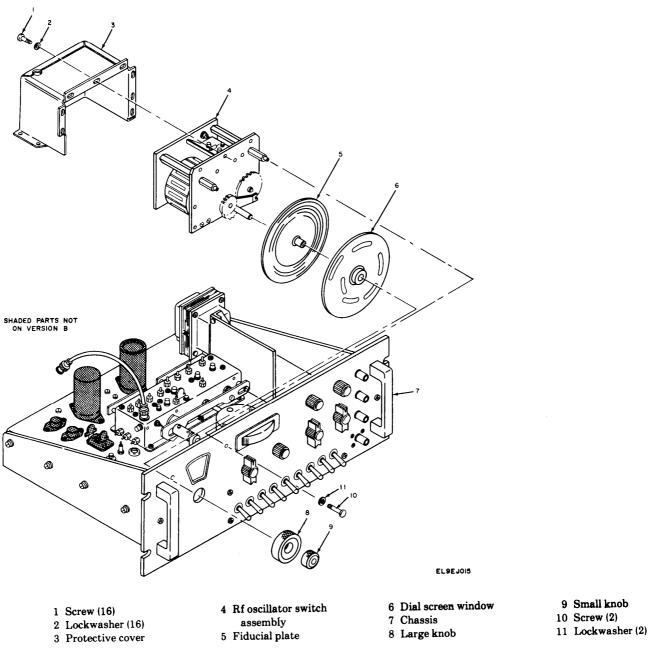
Rf Oscillutor Switch Assembly, Removal and Replacement.
